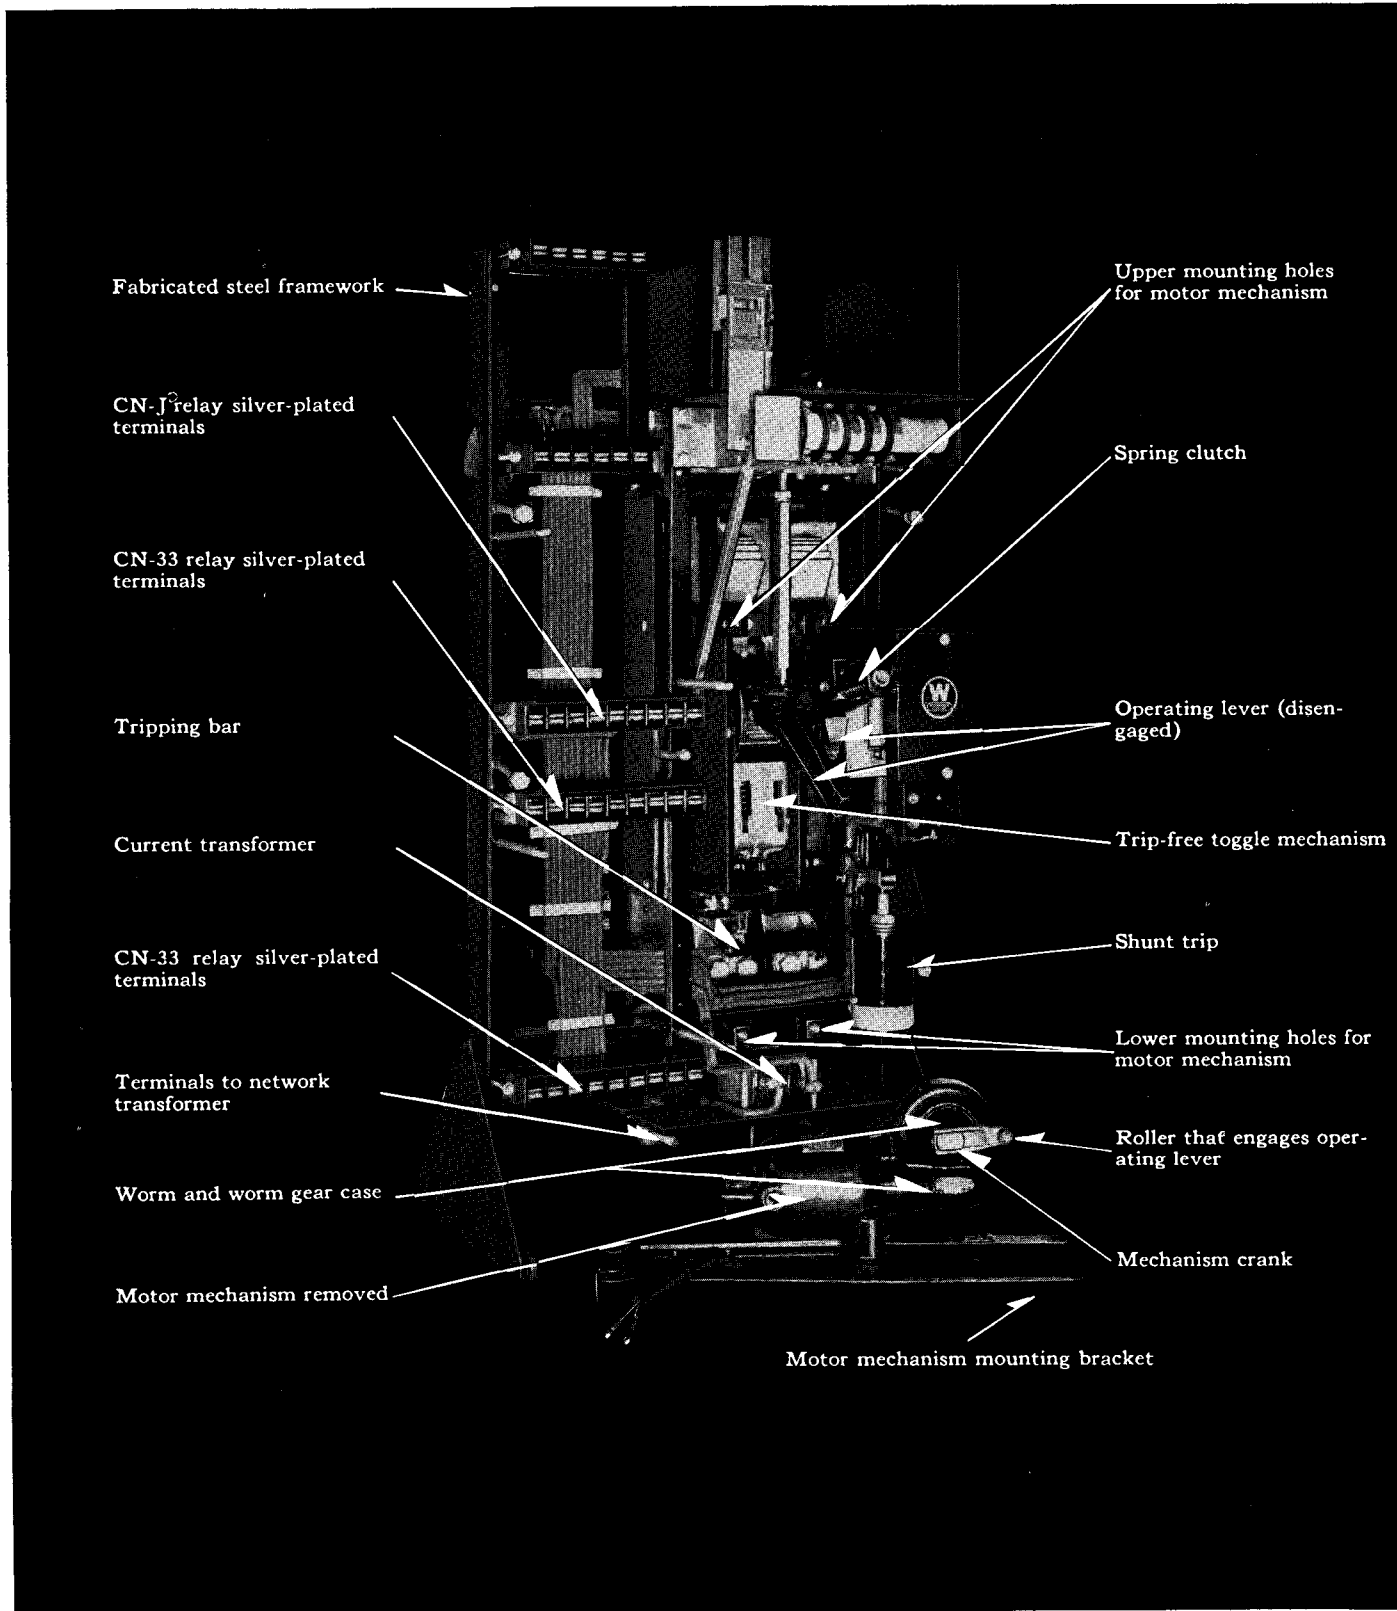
DETAILS OF THE CM-44 ROLL-OUT UNIT SHOWN BY COMPLETELY REMOVING MOTOR MECHANISM AND DISENGAGING OPERATING LEVER FROM BREAKER HANDLE LEVER
